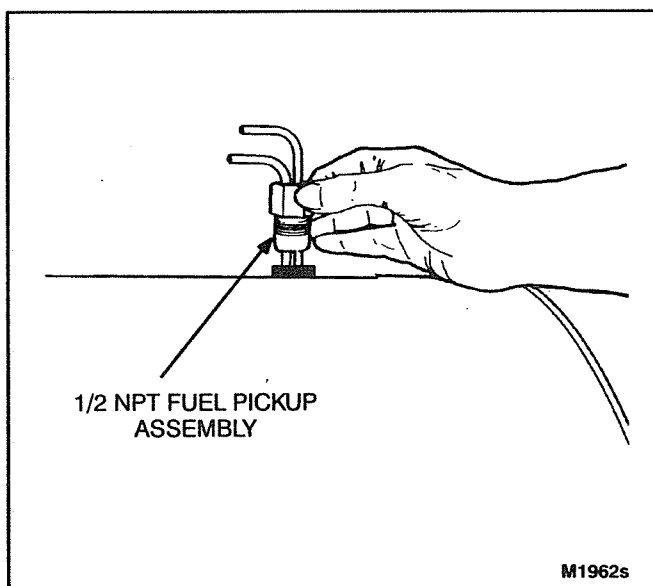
1/2-INCH NPT PICKUP ASSEMBLY
